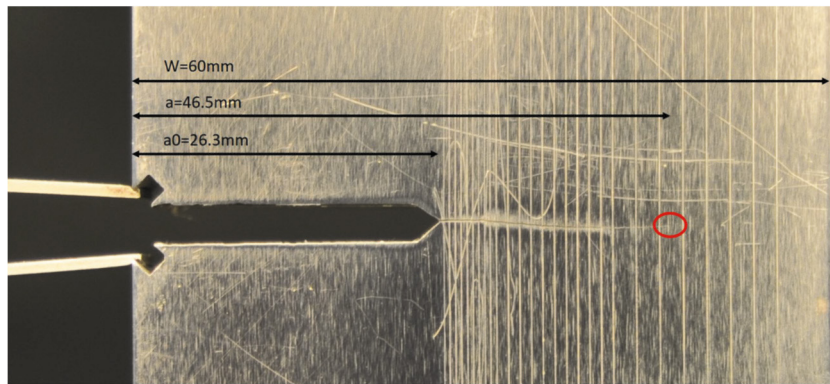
Detail of ESET specimen showing the machined starter notch and the final fatigue crack length $a=46.5\text{mm}$.
